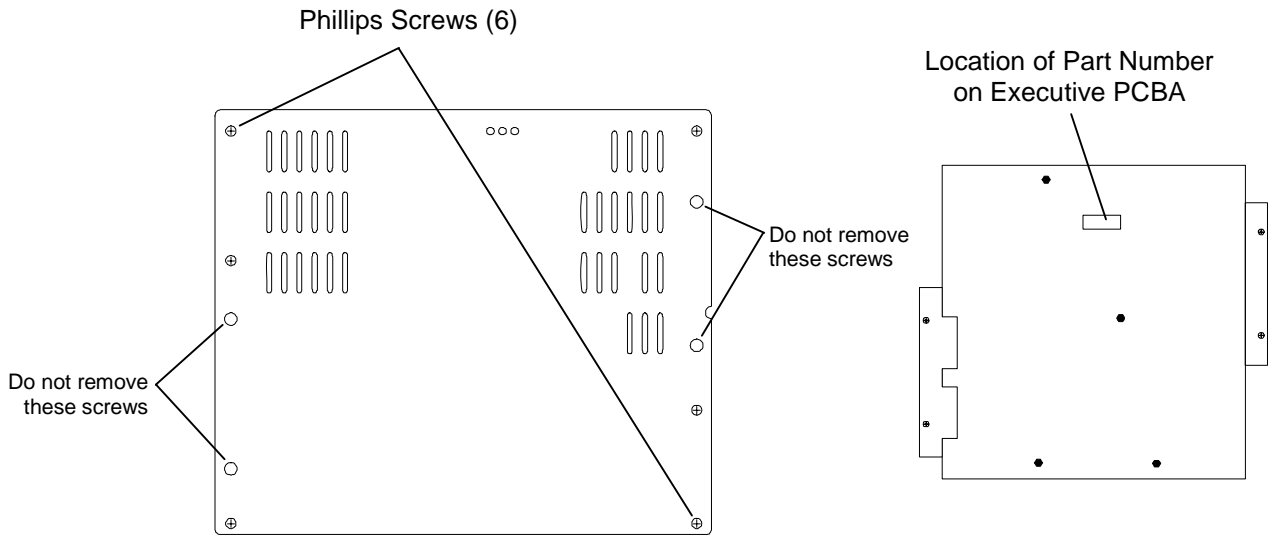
Rear Service Panel and PCBA Part Number Location
